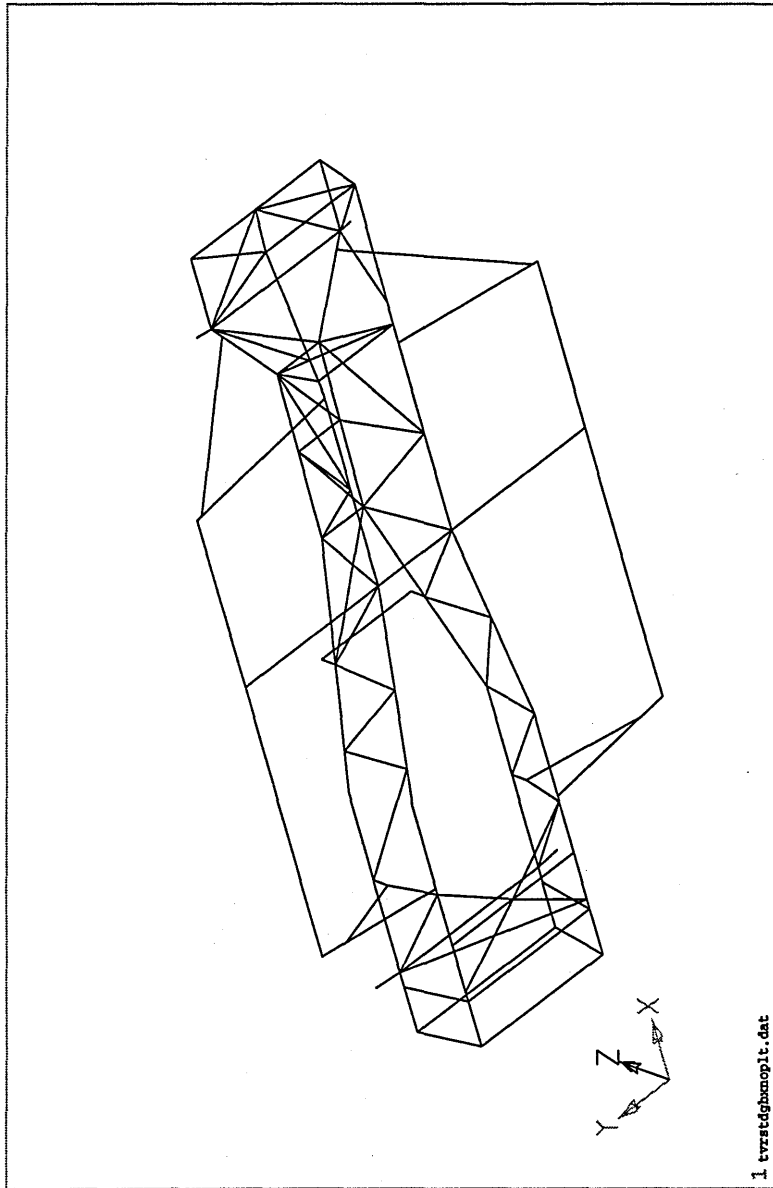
Chimaera Chassis with the gearbox member and no plate
